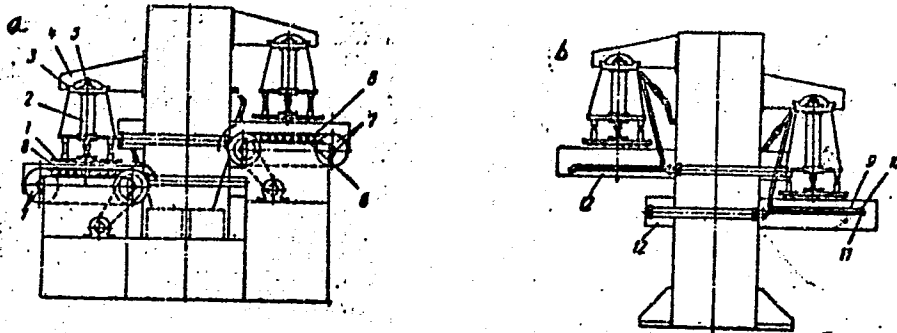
1 - Vacuum cartridge; 2 - cylinder; 3 - carriage; 4 - support; 5 - screw couple; 6 - spindle magazine; 7 - conveyor; 8 - conveyor belt of specified length; 9 - middle part of die; 10 - projections on the middle section; 11 - catches; 12 - guides of the press.
